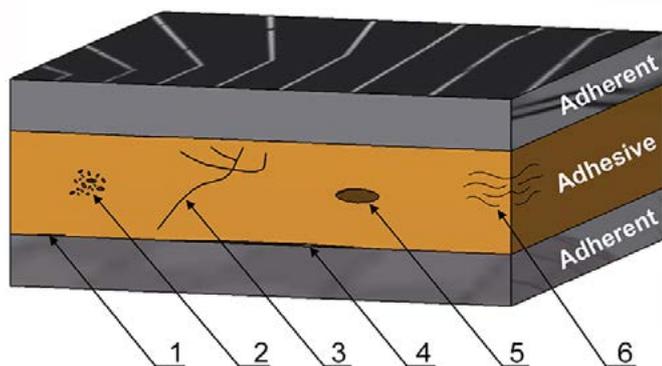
Imperfections in adhesive lap joints; 1 – “kissing” bond, 2 – porosity, 3 – crack, 4 – delamination, 5 – cavity, 6 – poor cure
